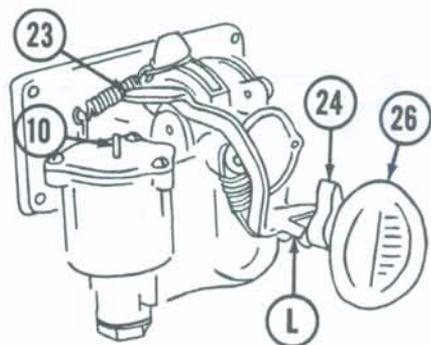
Carburetor is primed for starting by turning knob (26) counter-clockwise until primer cam (24) contacts tab (L) on primer lever (23) depressing lever to contact inlet needle (10).
